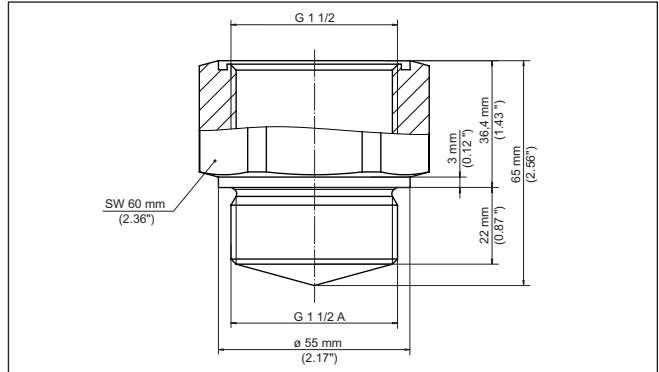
Dimensions of threaded adapter G1½ (DIN 3852-X) on thread G1½, G2 (DIN 3852-X)
